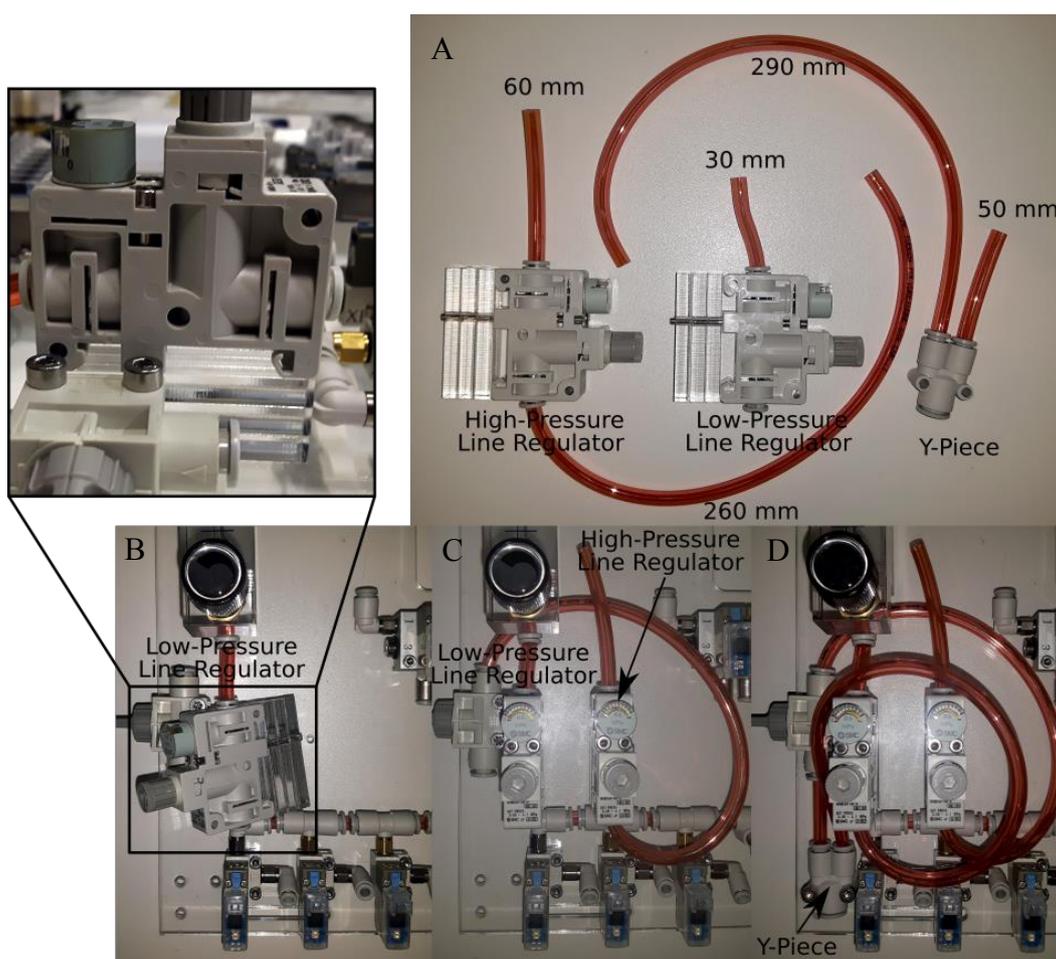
Assembly of the pressure regulators for the high- and low-pressure inert gas lines. A) Assembly of the two pressure regulators and the Y-piece with tubing of appropriate length. B) to C) shows mounting and connectivity between the two pressure regulators and the Y-piece.
